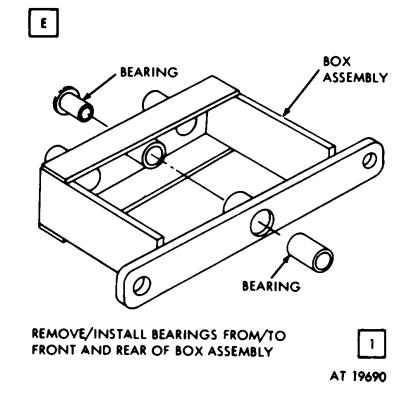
Removal or installation of control box assembly (sheet 3 of 3).
